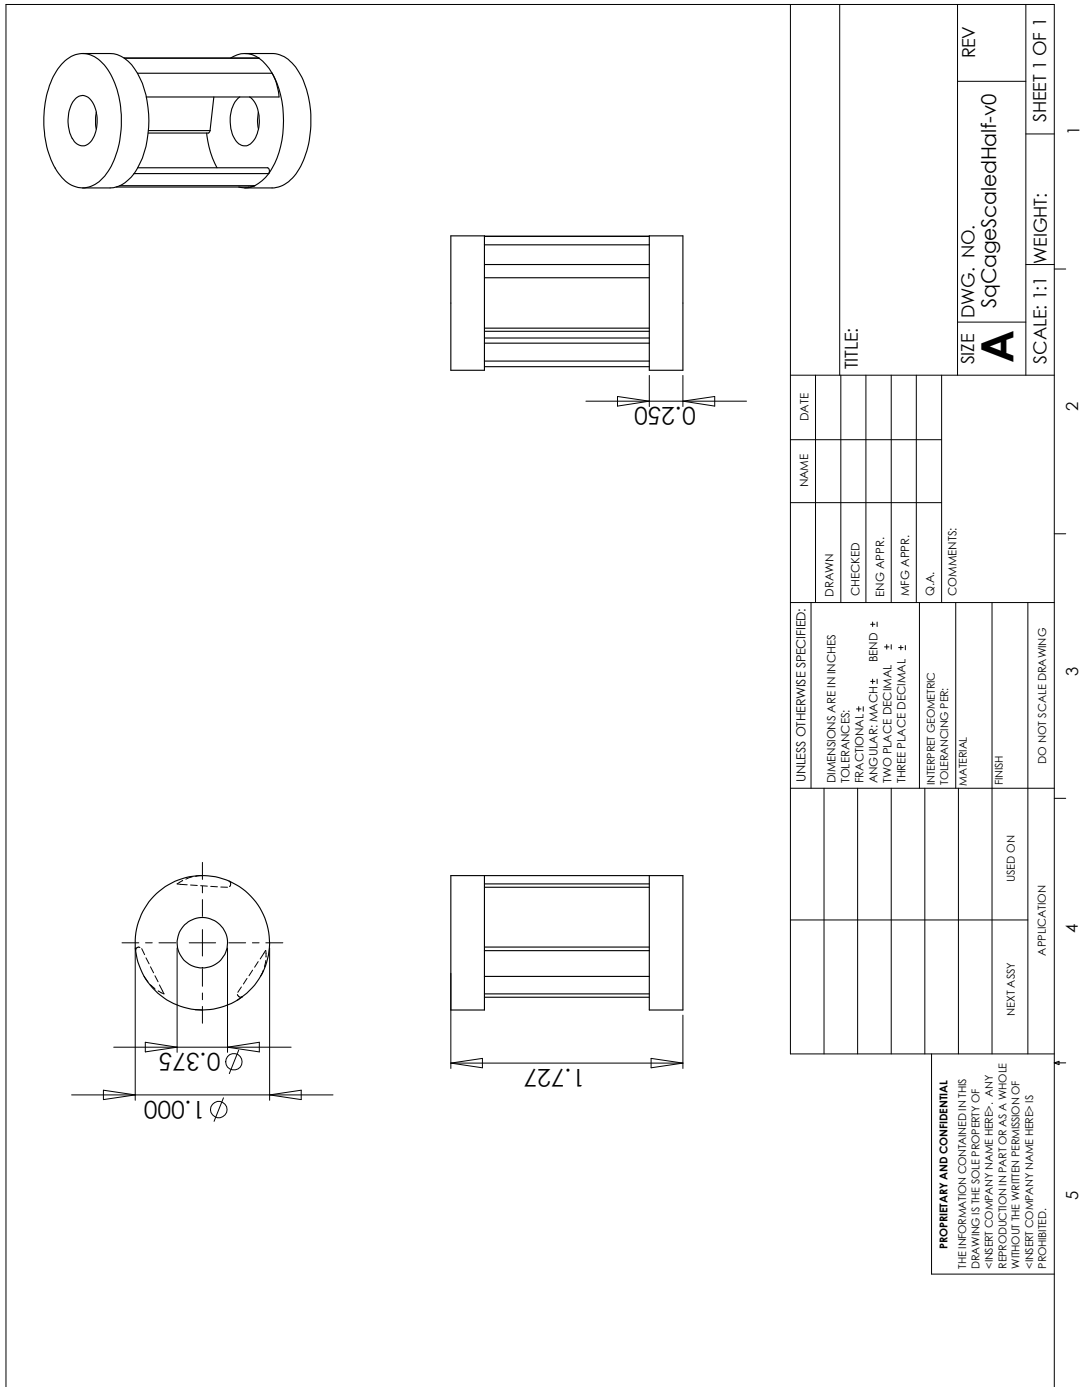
Squirrel Cage Darrieus Turbine Part Drawing.
